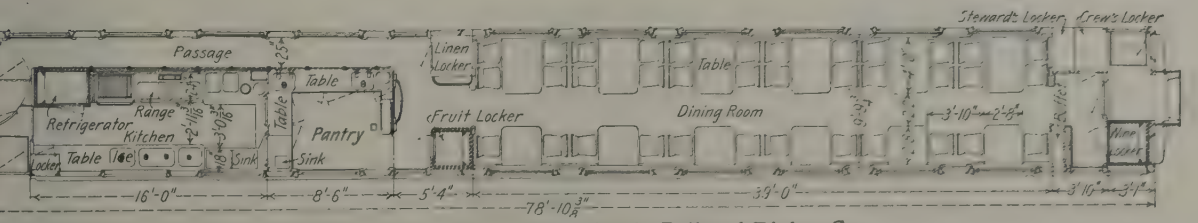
Floor Plan of Pennsylvania Railroad Dining Car.
